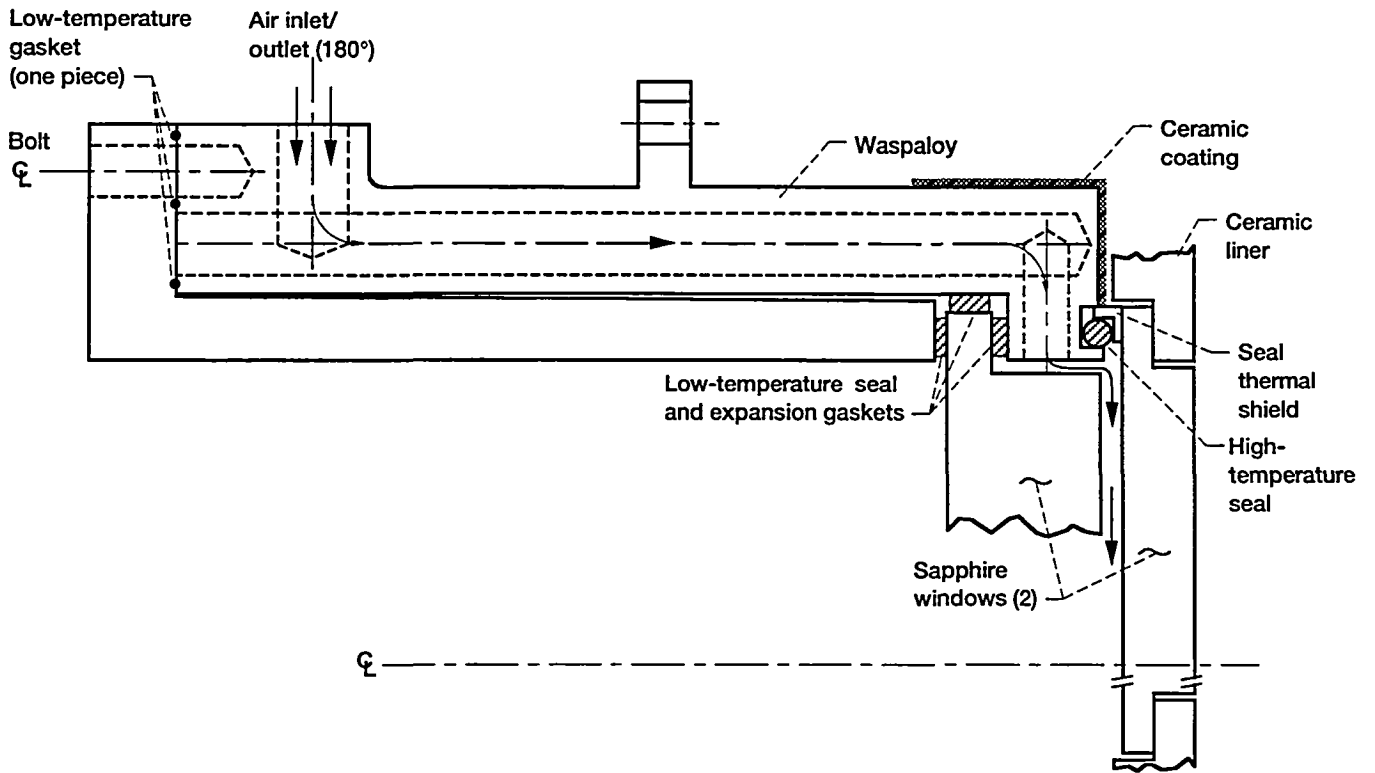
Air-cooled window assembly (window viewing area = 2.00-in. diam).
